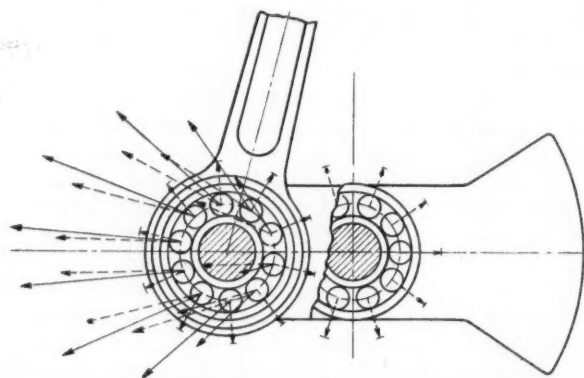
Centrifugal forces on the rollers of a roller bearing on the connecting rod head
